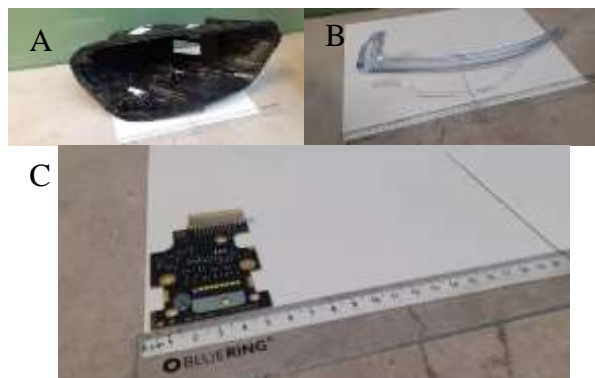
Parts after dismantling (examples): back cover (A), optical plastic parts (B), and PCB with LEDs (C)
